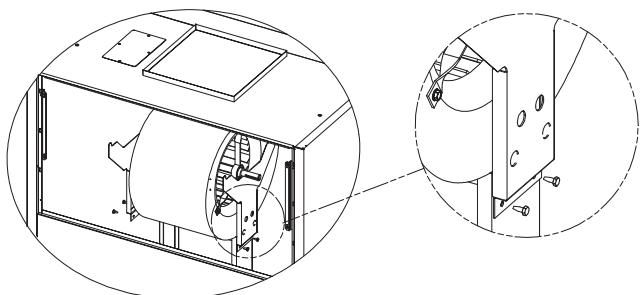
Remove Bolts from Blower Panel and Sides
